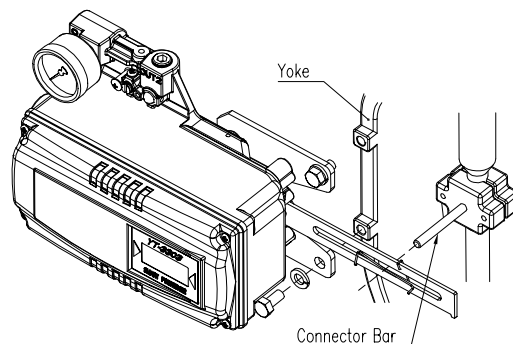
Attaching the bracket to actuator yoke (YT-3303L / 3301L)
